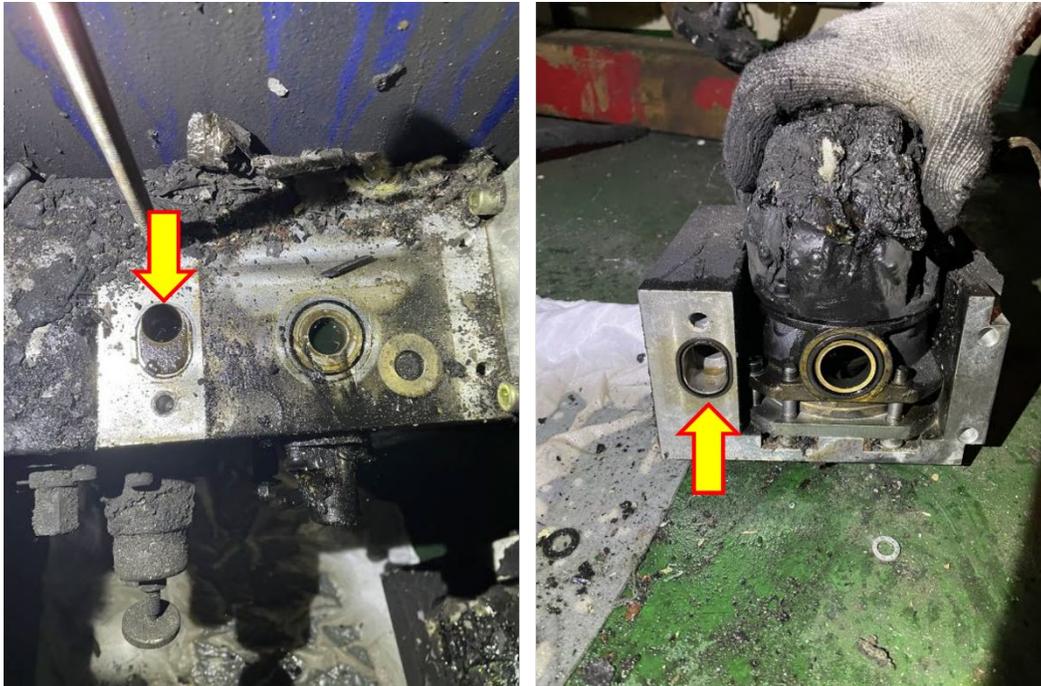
Left to right: Lower module of the oil fittings block showing overlap between the lower and upper module fuel ports as indicated by the arrow. Upper module of oil fittings block and fuel flow meter showing the pinched O-ring as indicated by the arrow. (Source: Lemissoler Shipmanagement)
